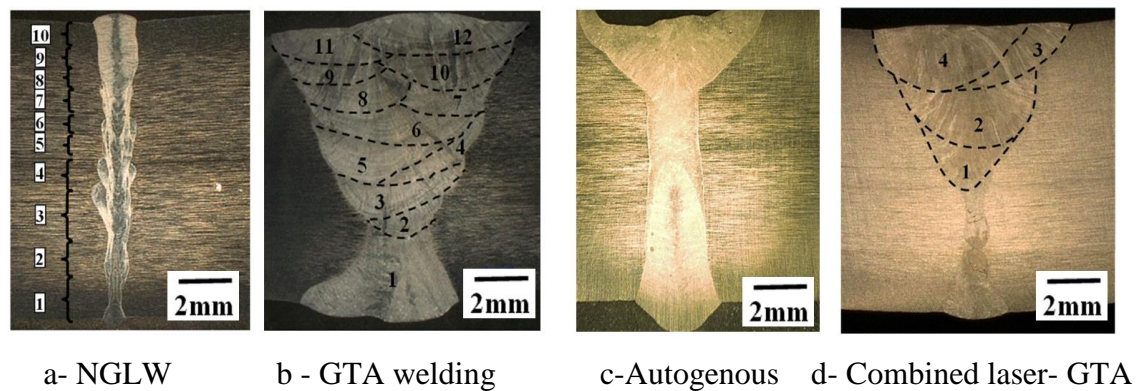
Bead cross section of 10 mm thickness welding 1 side
